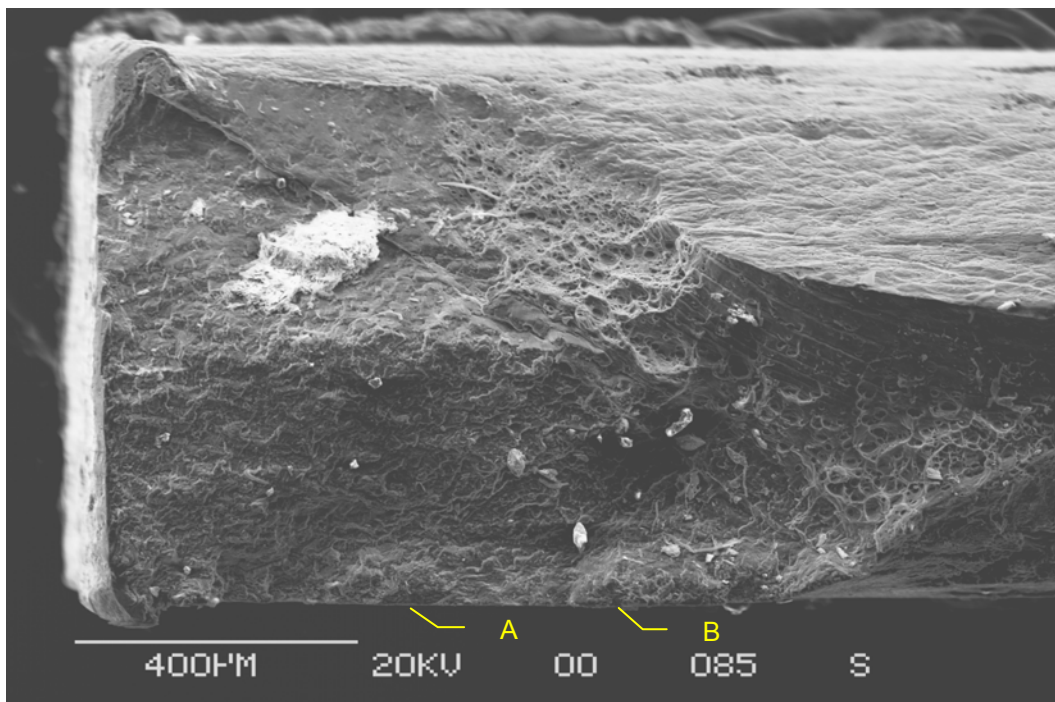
Fatigue Crack on Fracture Surface of Specimen 5618.
